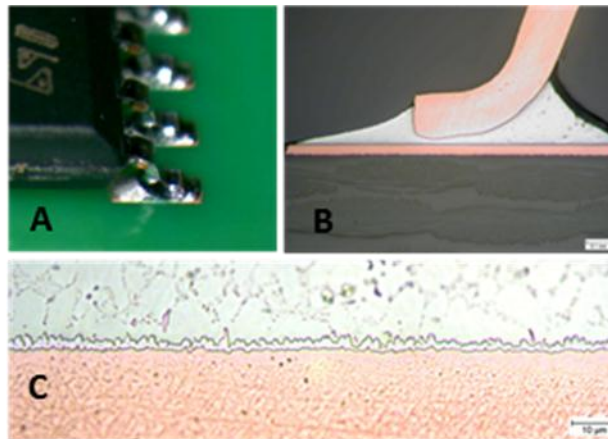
Component soldered on a plasma finish board. Optical microscopy image of component on board (A), microsection of component leg and solder joint (B), microsection showing continuous Cu_6Sn_5 intermetallic between copper pad and solder (C).
